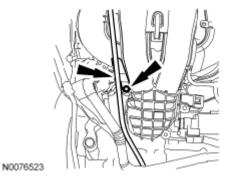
Locating Oil Level Indicator Tube And Bolt
